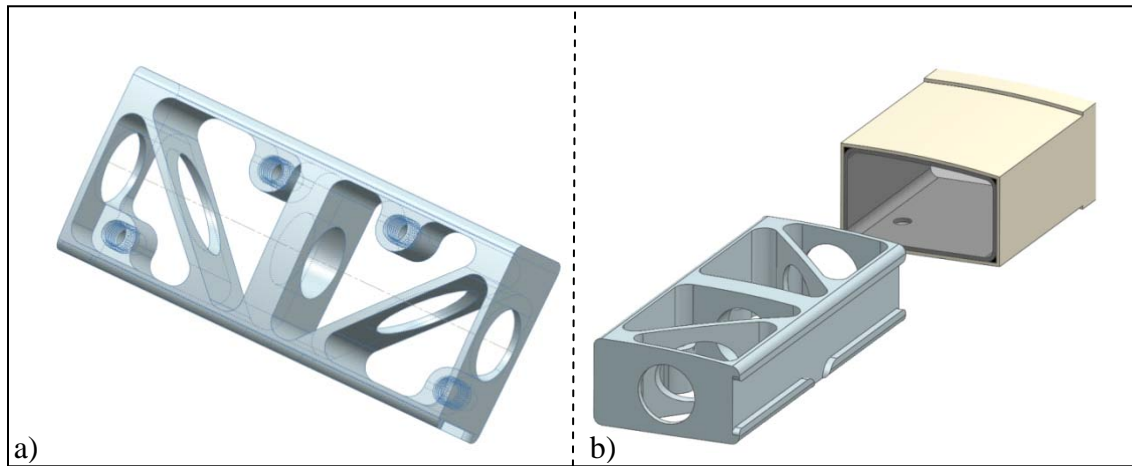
a) Joiner block and b) alignment between joiner block and wing box [9]
